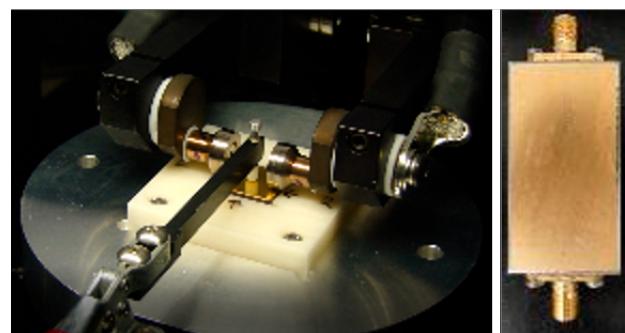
Hermetic sealing using special electrodes that weld the lid onto the package to create a continuous seam. This type of sealing is typically performed on high-reliability microelectronics packages that need to survive in harsh conditions.
